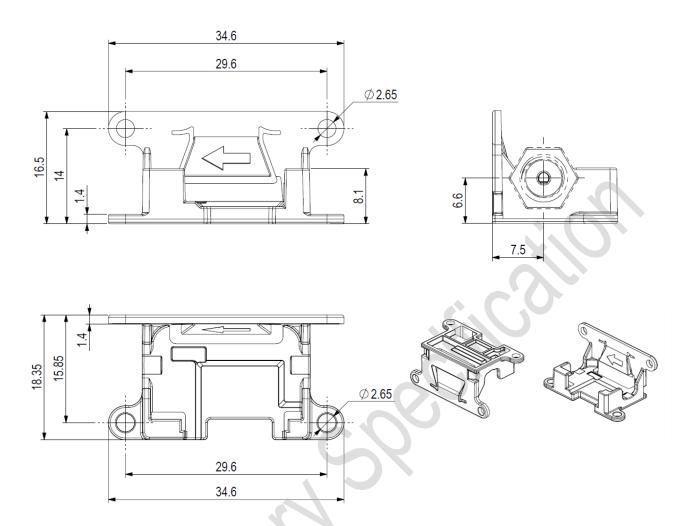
Dimensions of SLF3x mounting clamp (all dimensions in mm)
